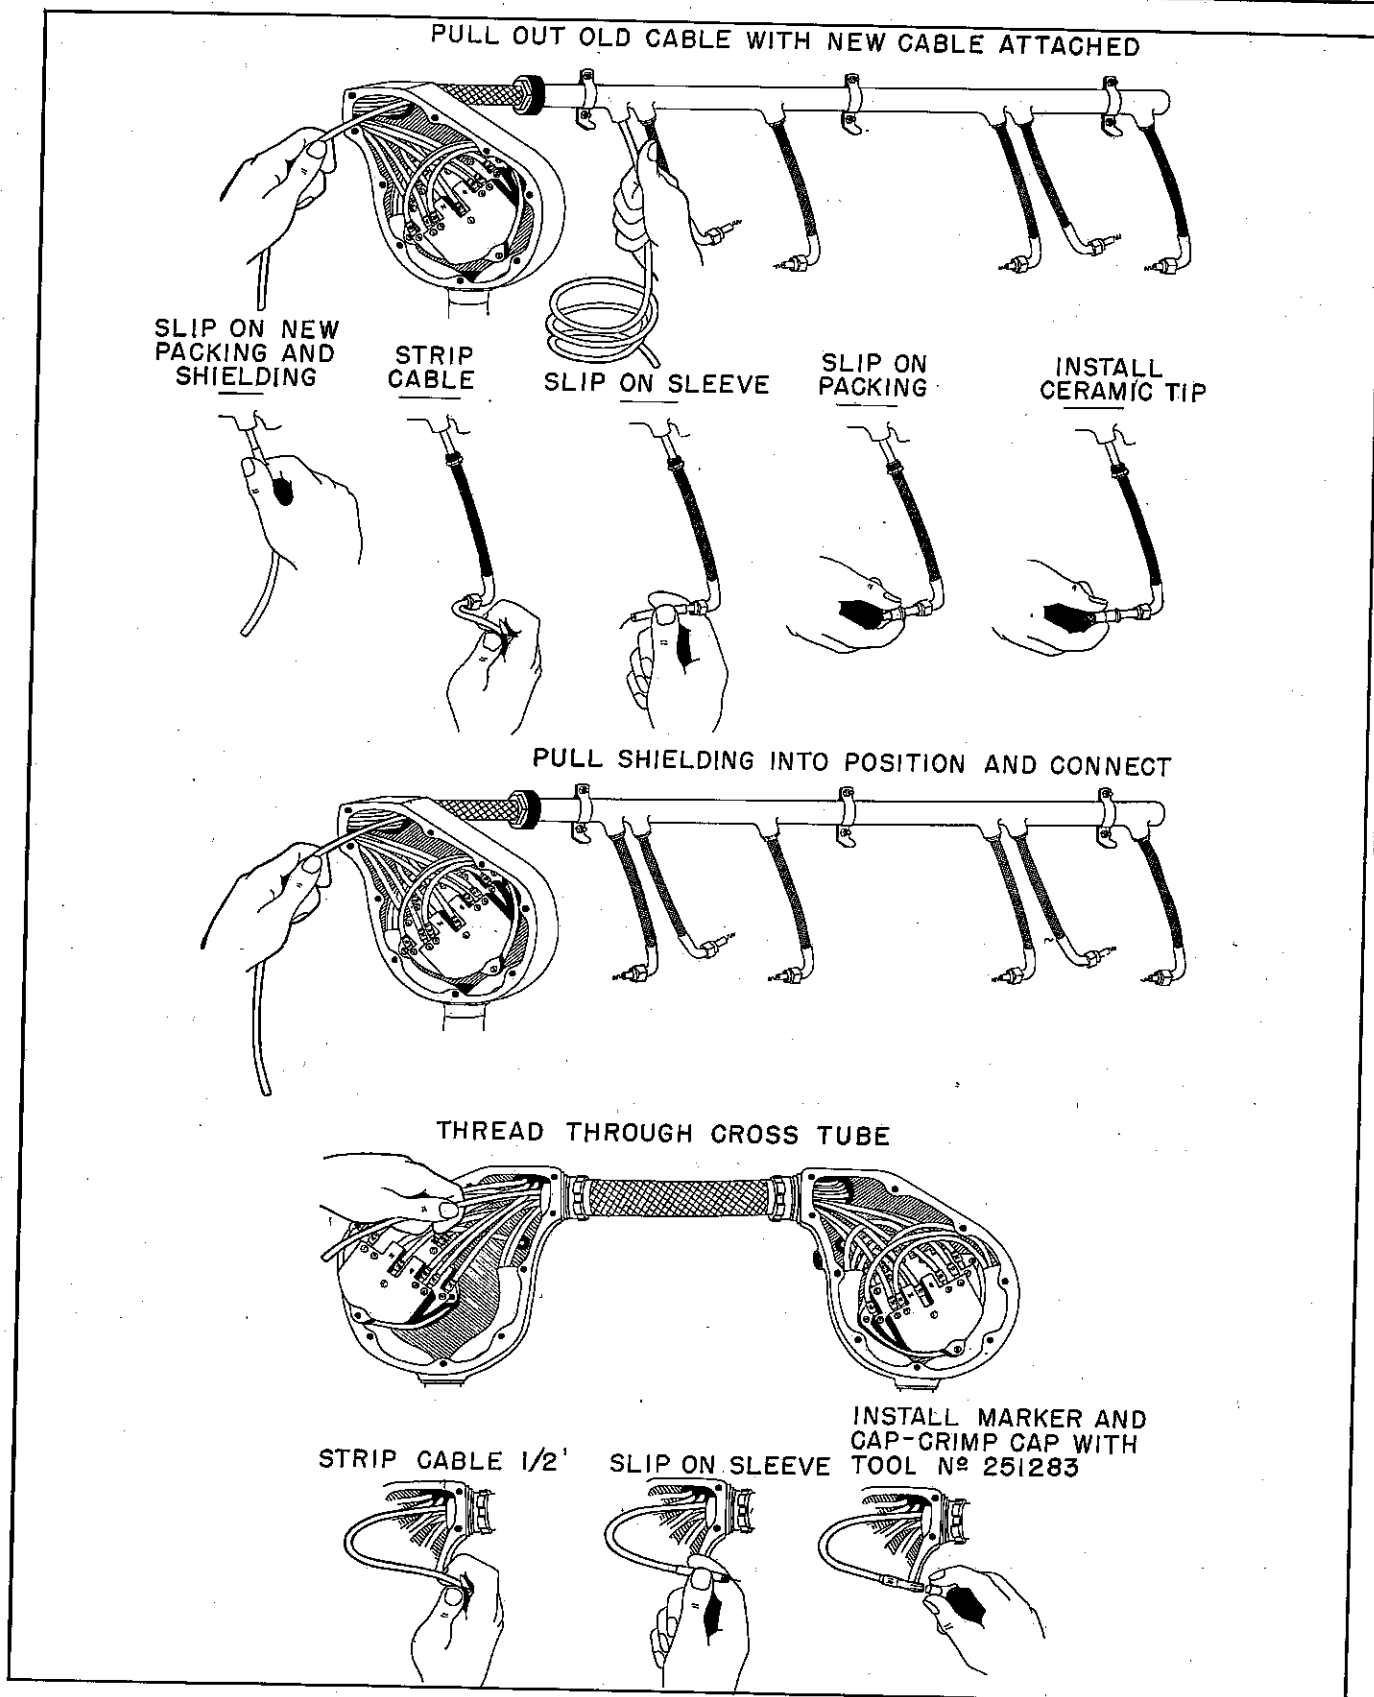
Installing Replacement Intake Ignition Tube Cable.
